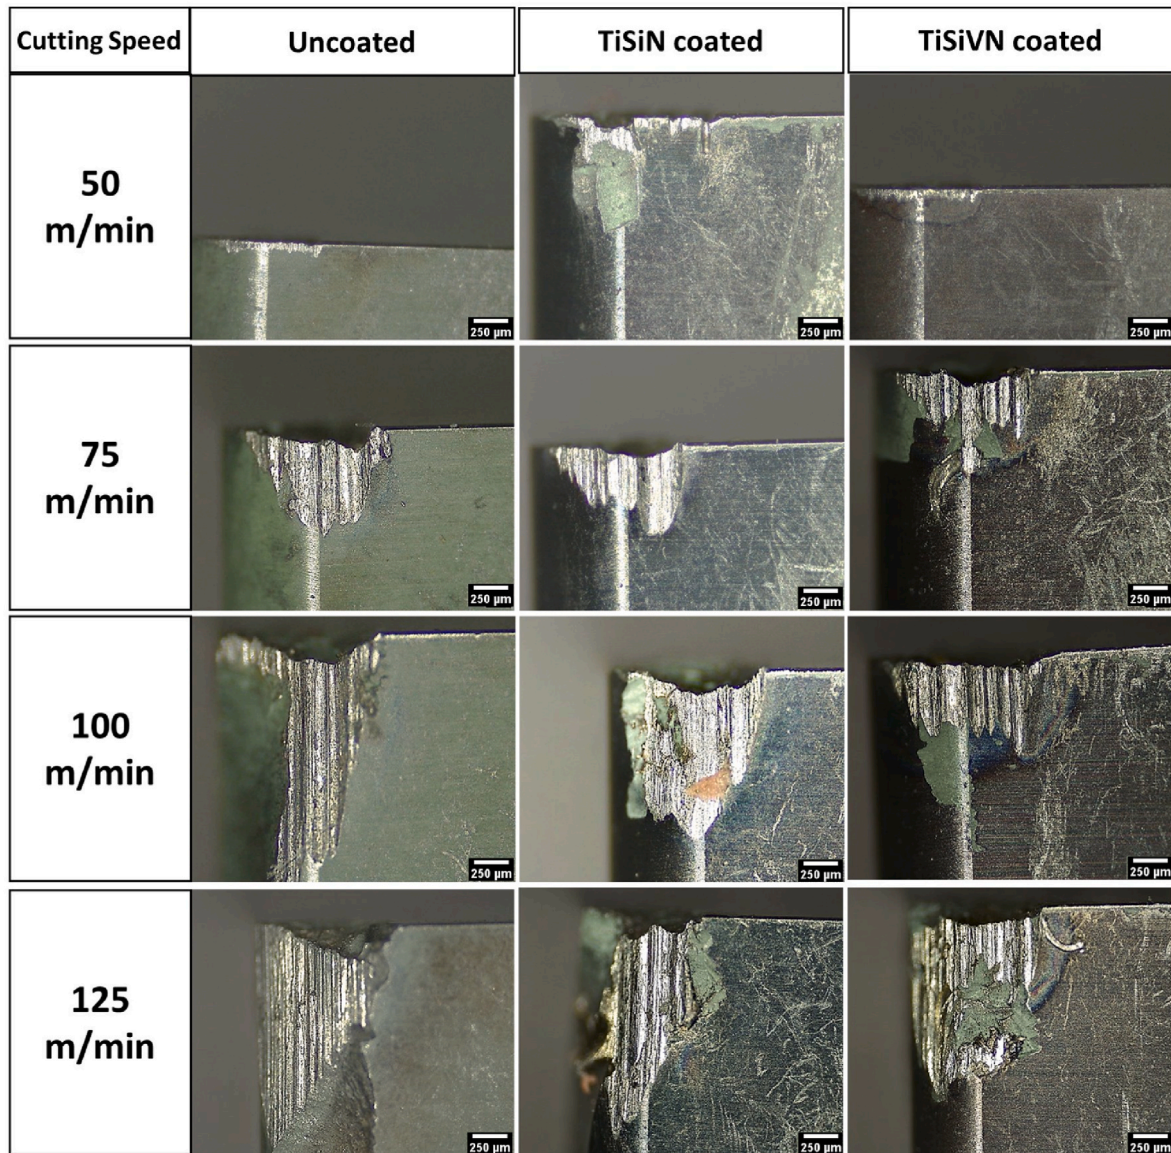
Optical microscope images depicting wear on the flank surface after machining.
